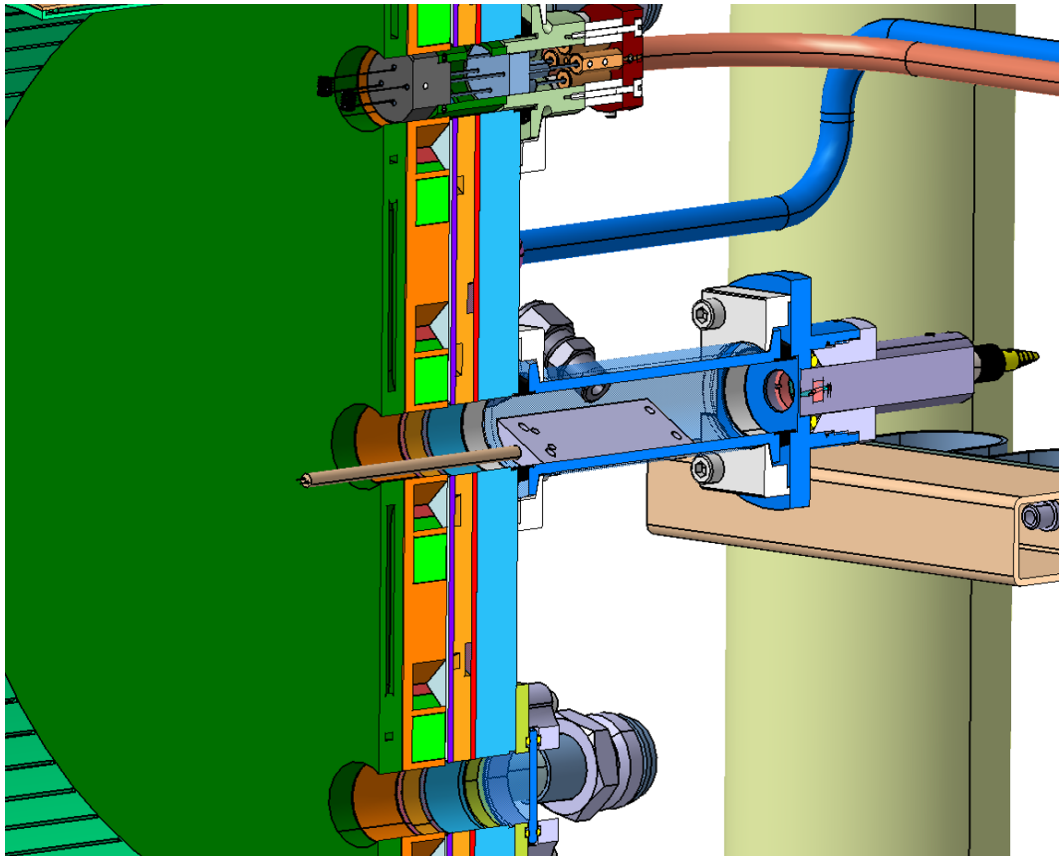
3D CAD cut view of the probe assembly on one of the RF drivers in SPIDER. The Plasma Light telescope downstream of the KF25 tube hosting the gas inlet is also visible.
